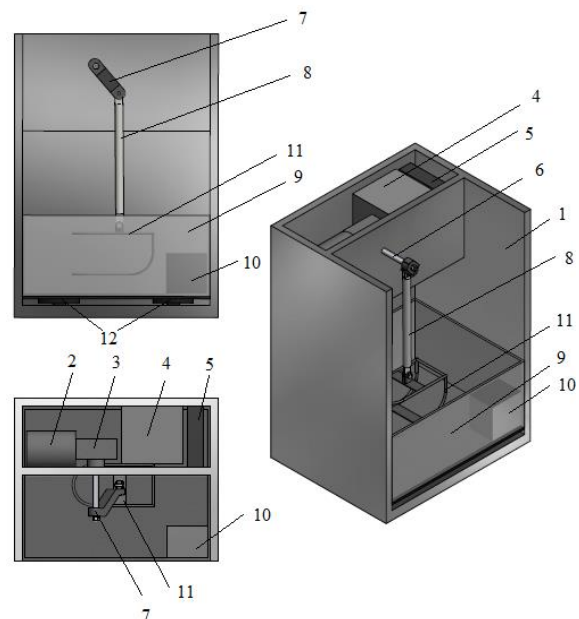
Simulation complex: 1-hull; 2-motor; 3-reducer; 4-power unit; 5-microcontroller; 6-secondary shaft; 7-crank; 8-rod; 9-vessel with solution; 10-thermo-regulating unit; 11-occlusion unit (replaced with plaster blocks and response part); 12-tensometric sensors.
